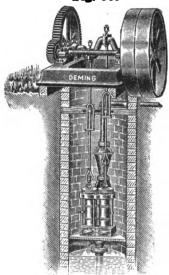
illustrates our Geared Power Working Head with Fig. 348 Double
